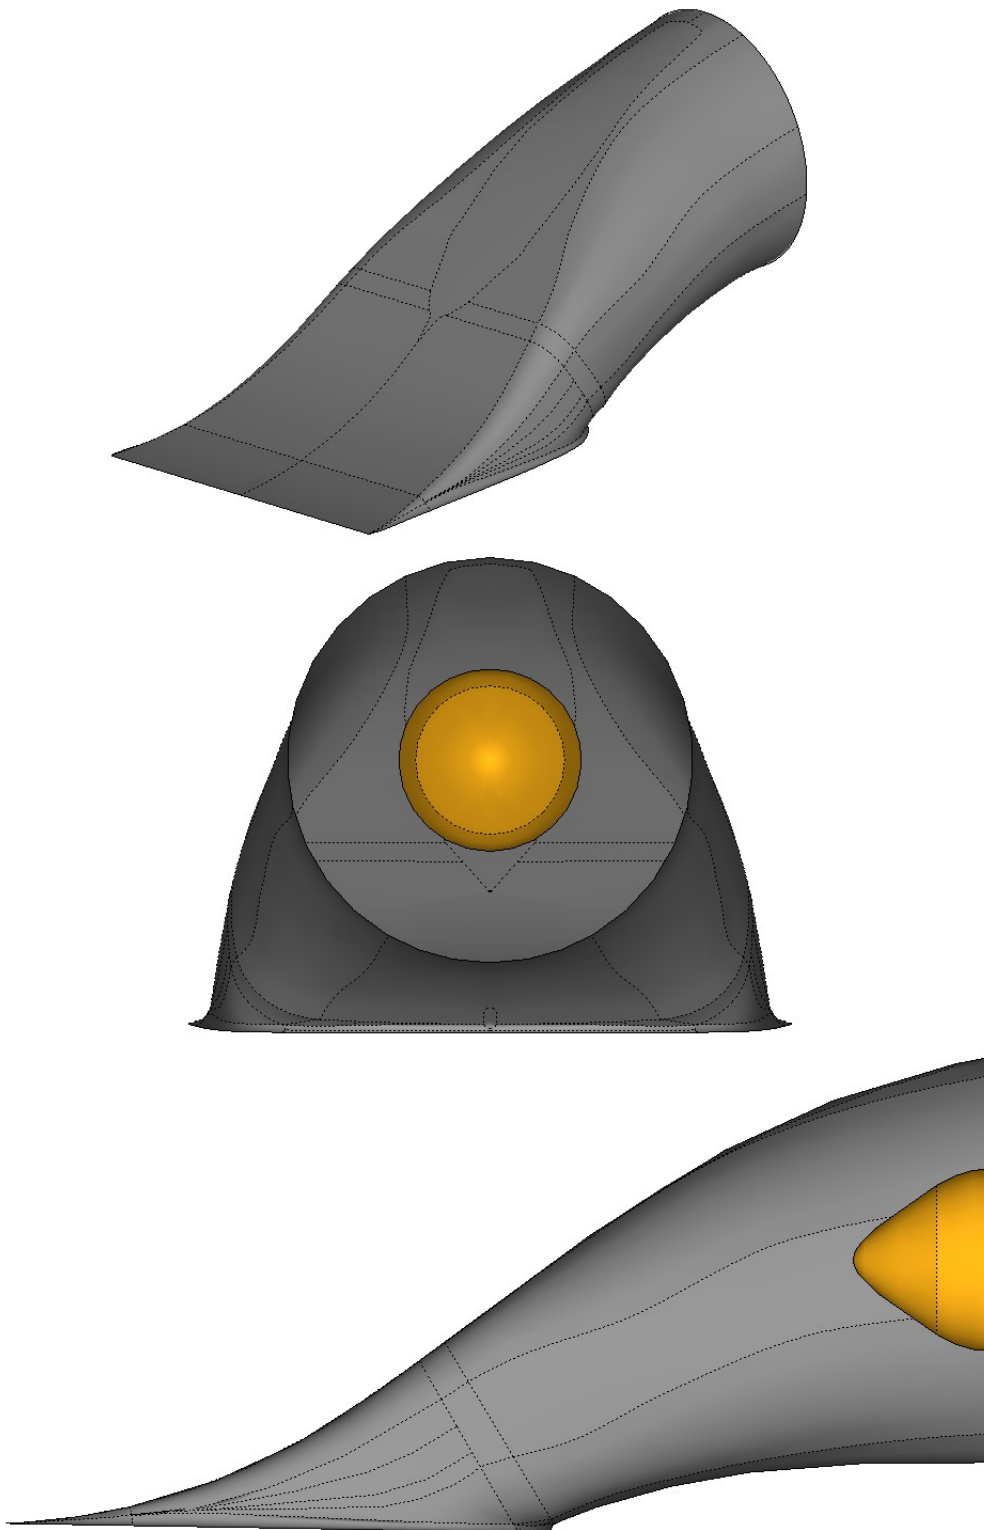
3D image, rear and right views of the Castoldi TD 340 HC inlet without the drive shaft.
